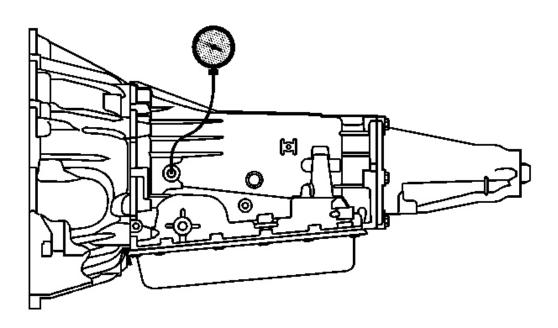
Using Pressure Gage To Test Line Pressure Courtesy of GENERAL MOTORS CORP.
